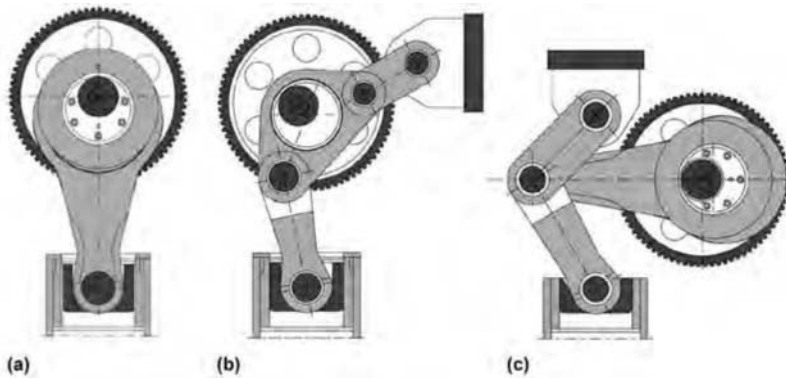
Common drives for mechanical presses: (a) crank press, (b) link drive press, and (c) knuckle joint press. Source: Ref 10.9
